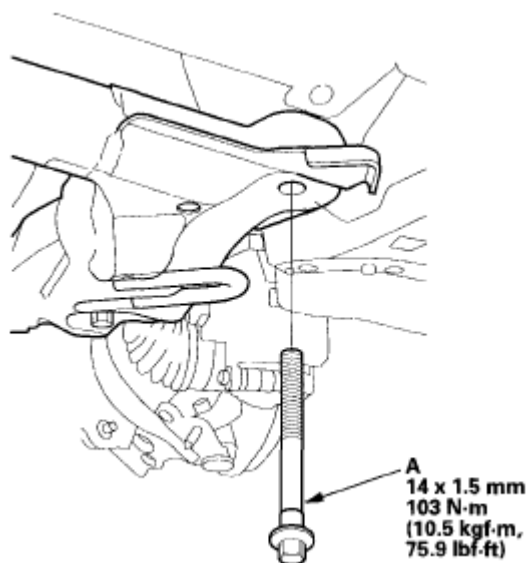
Identifying Front Subframe Front Mounting Bolts (With Torque Specifications)
